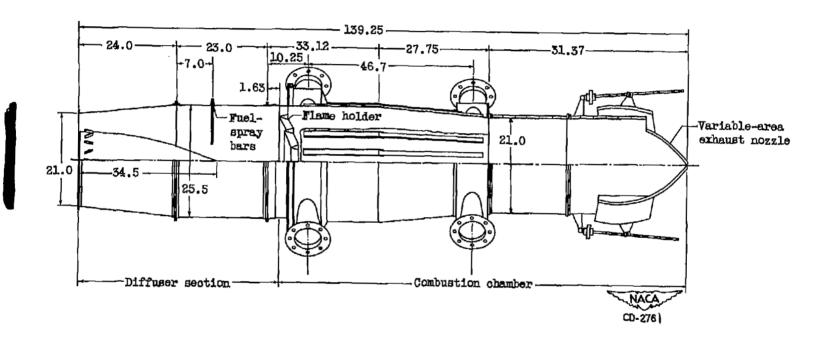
Sectional view of afterburner. (All dimensions are in inches.)
